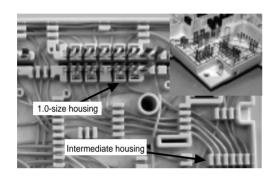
Wiring board with 1.0-size housing. Conventional wire J/B is shown in the insert.
